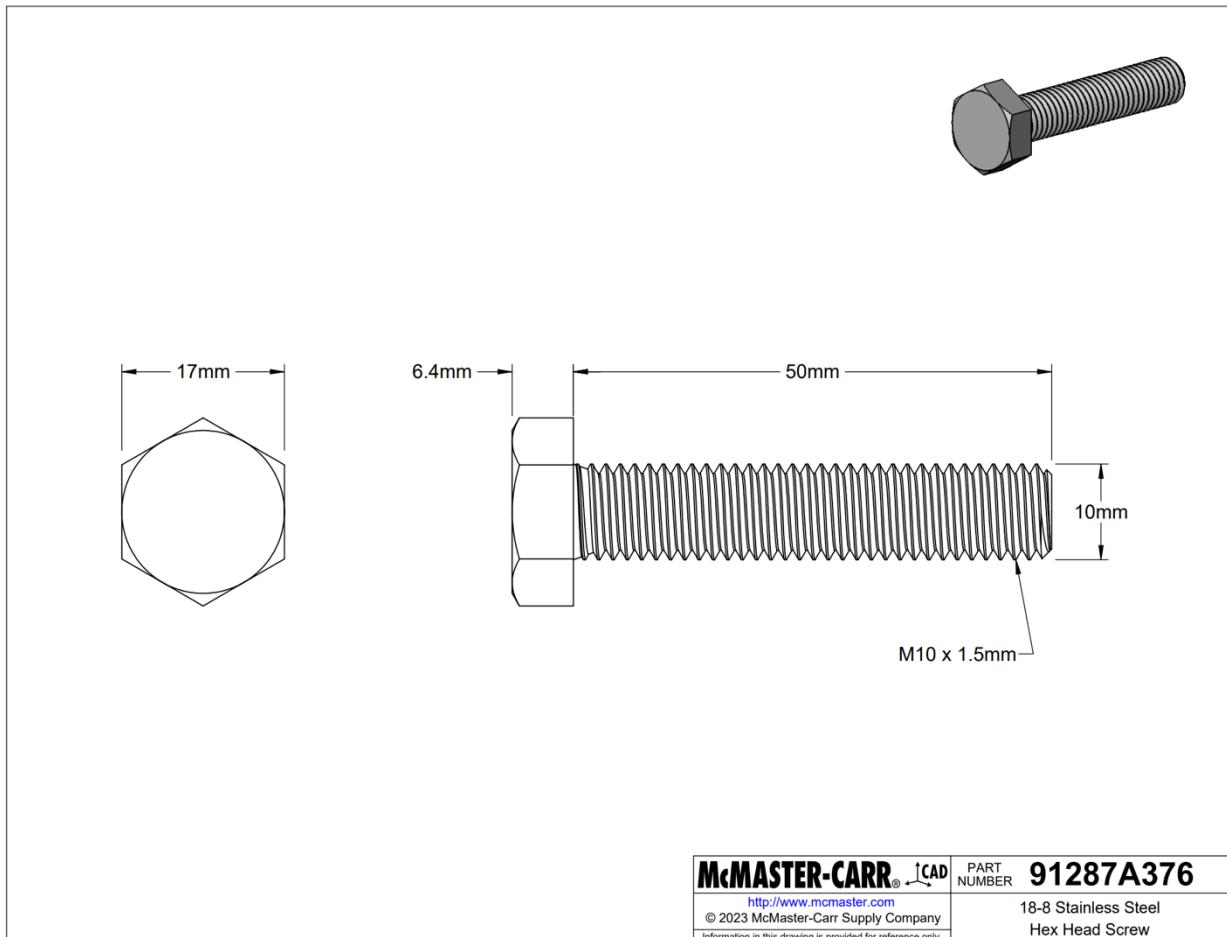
2D CAD drawing of the 91287A376 screw
